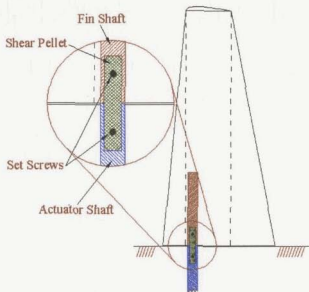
Control Surface Geometry and Attachment Scheme
